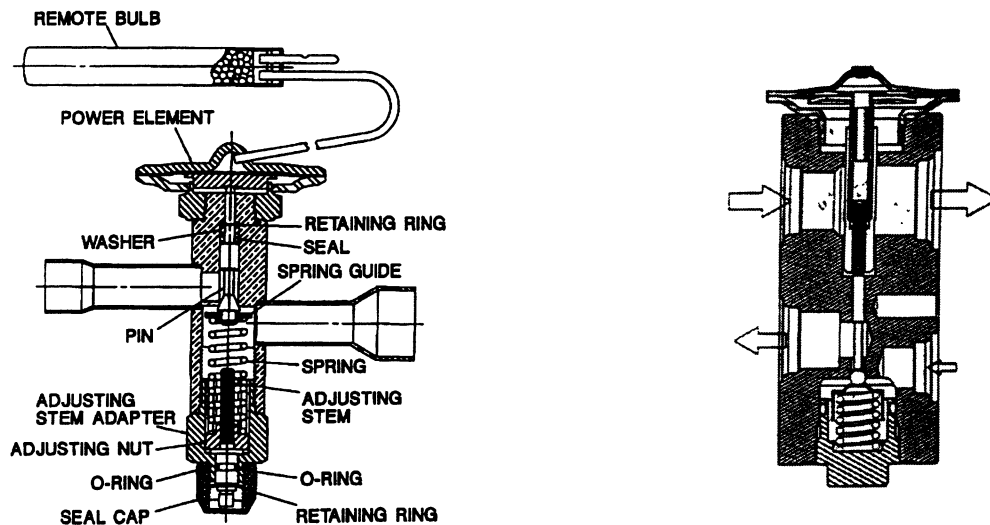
Schematic of Bulb and Block Type Thermostatic Expansion Valves (4) (5)
